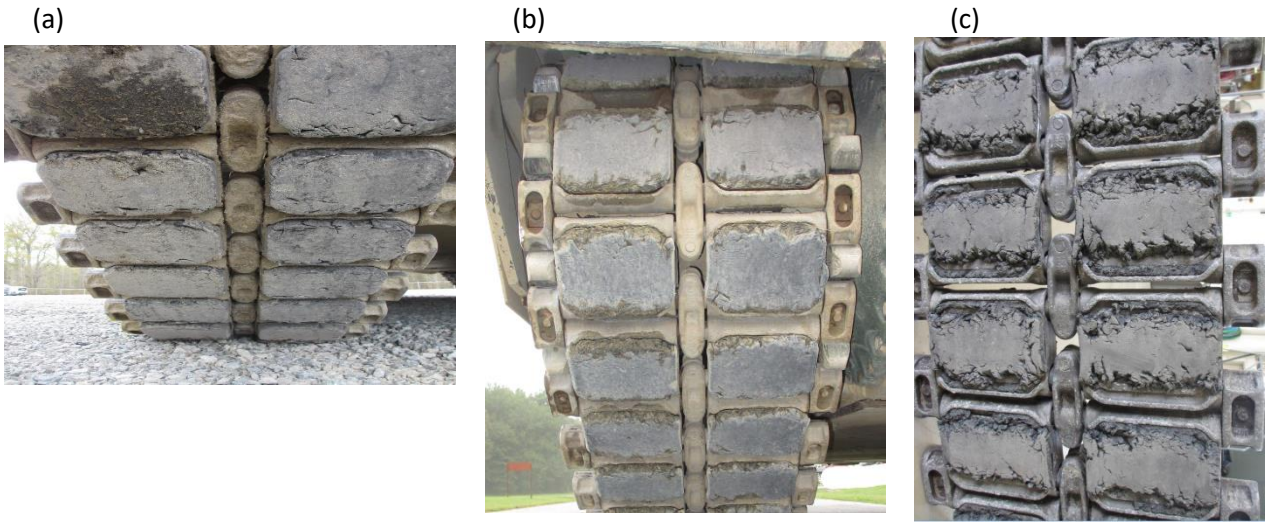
Track pads after (a) 500 miles, (b) 1,100 miles and (c) final mileage of testing.
